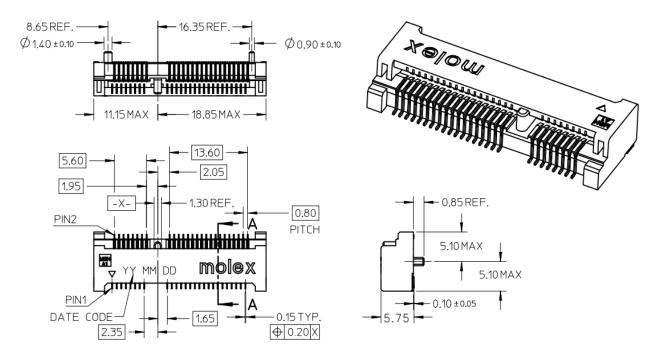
Dimensions of the Mini PCI Express Connector (Molex 679105700)
